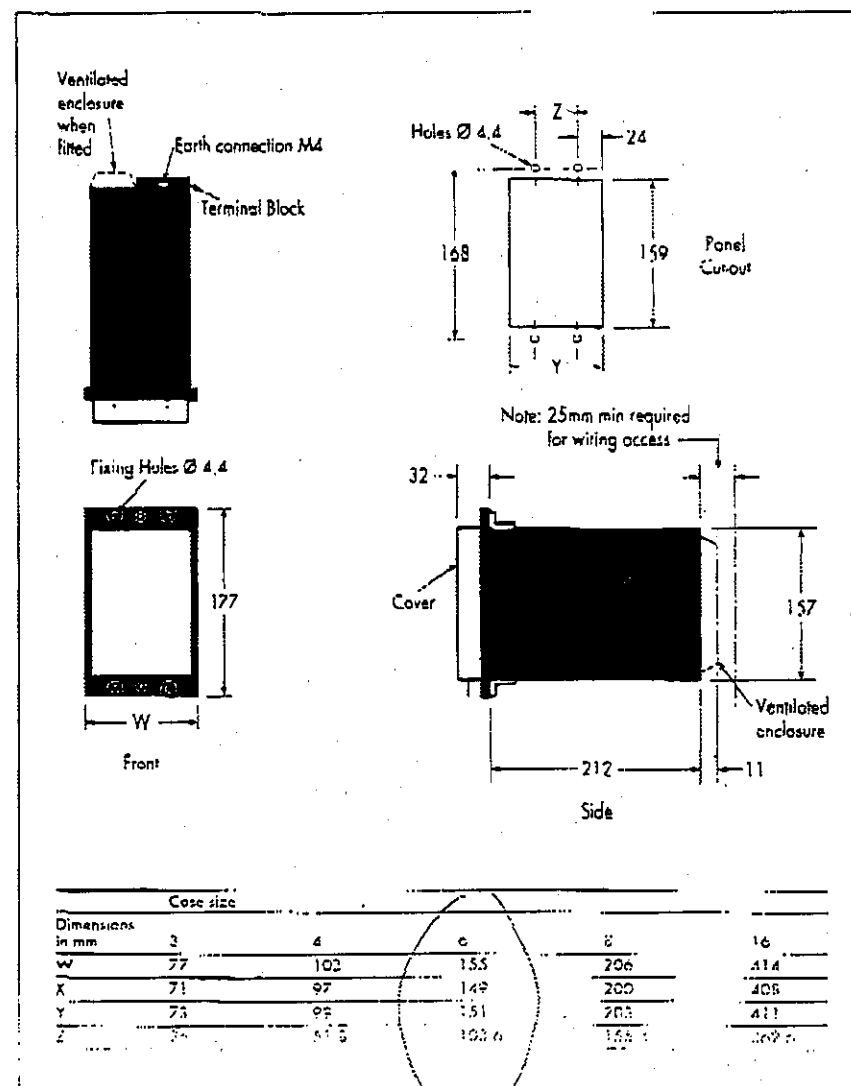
Case and panel cut-out dimensions for relay case sizes 3 to 16
